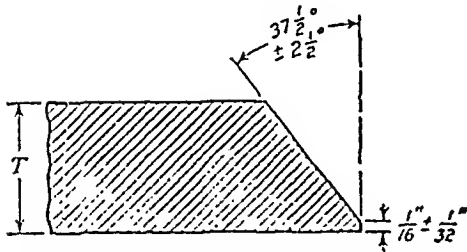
RECOMMENDED BEVEL FOR WALL THICKNESSES (T) AT END OF FITTING, 3/4 IN. OR LESS
